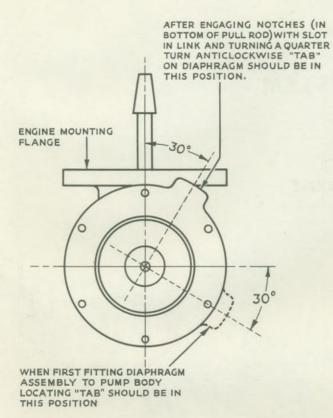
Fitting diaphragm to "UE" type petrol pump.
